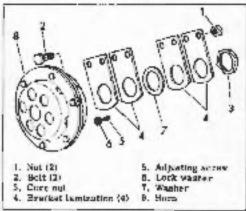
K-4. Horn 1992-62 Servi Car Sportster CH
